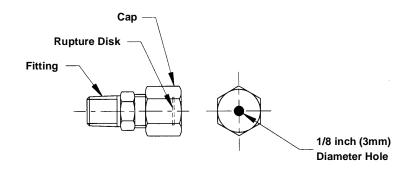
LUBRIQUIP BLOW-OUT FITTING ASSEMBLY
